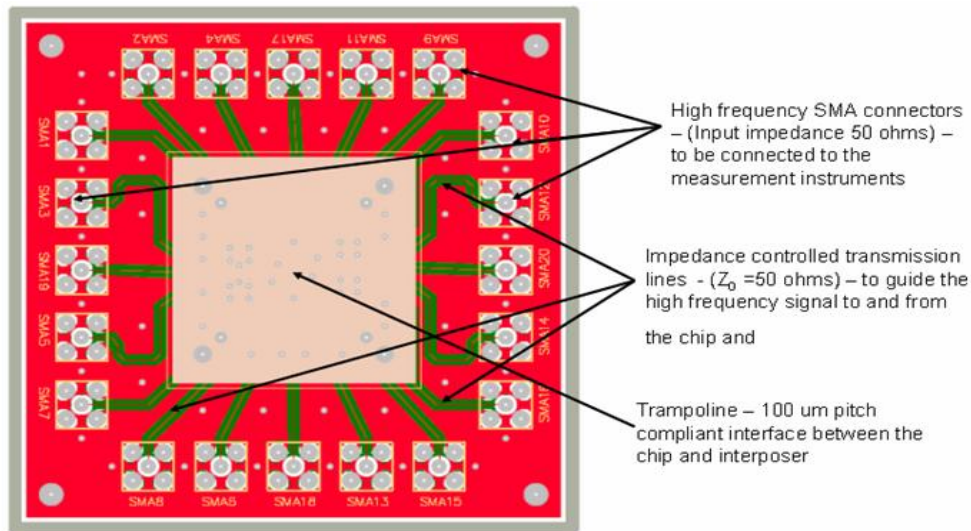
Top view showing the layout of the proposed elastomer interposer
